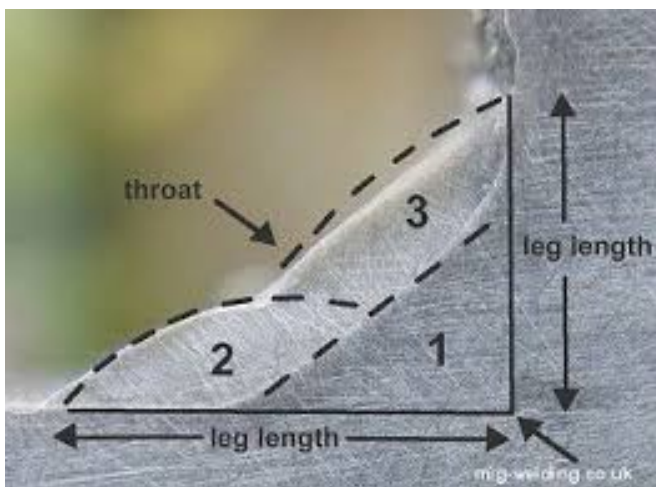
Typical weld construction for greater than 6mm welds.
